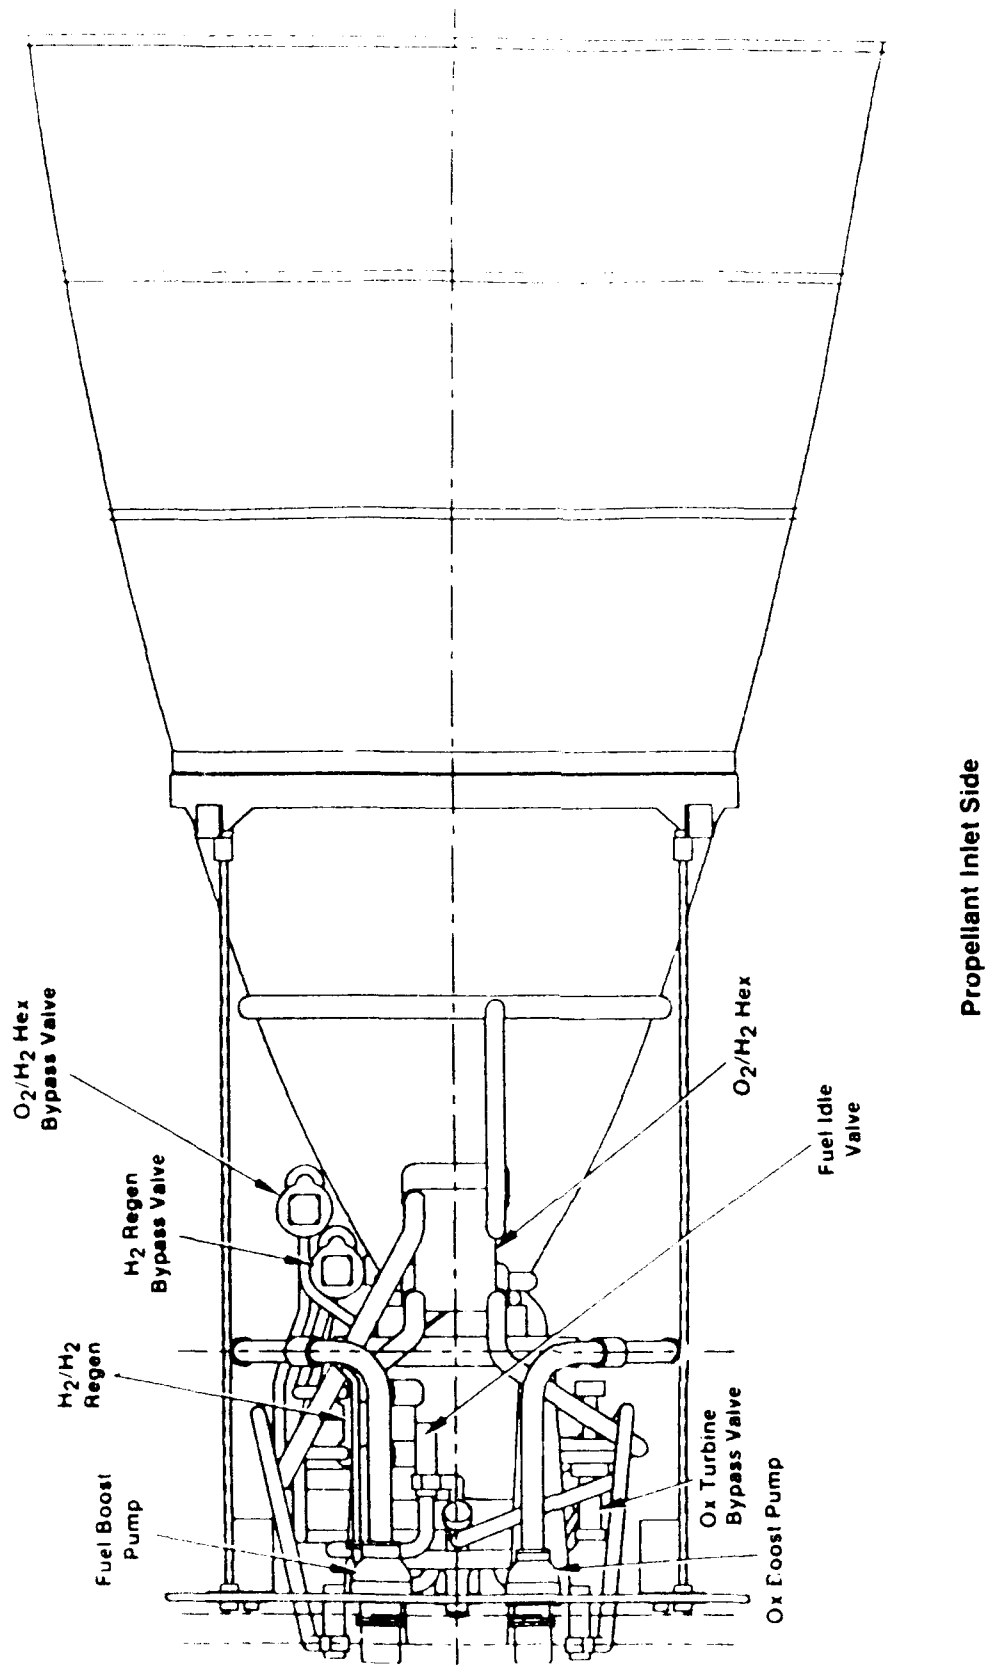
OTV Engine Preliminary Design-Component Locations View B
